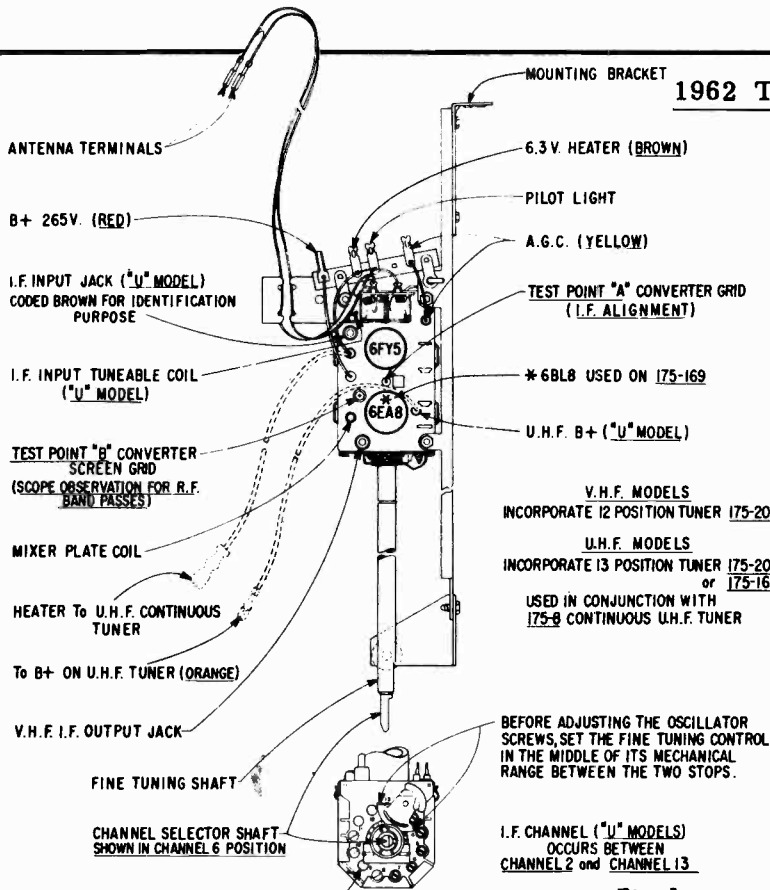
Tube and Trimmer Layout, Bandswitch Tuner
